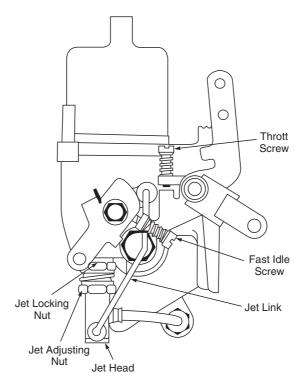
Exterior View of a S.U. (H.S. Type) Carburettor (*Courtesy:* Hindustan Motors Ltd.)
